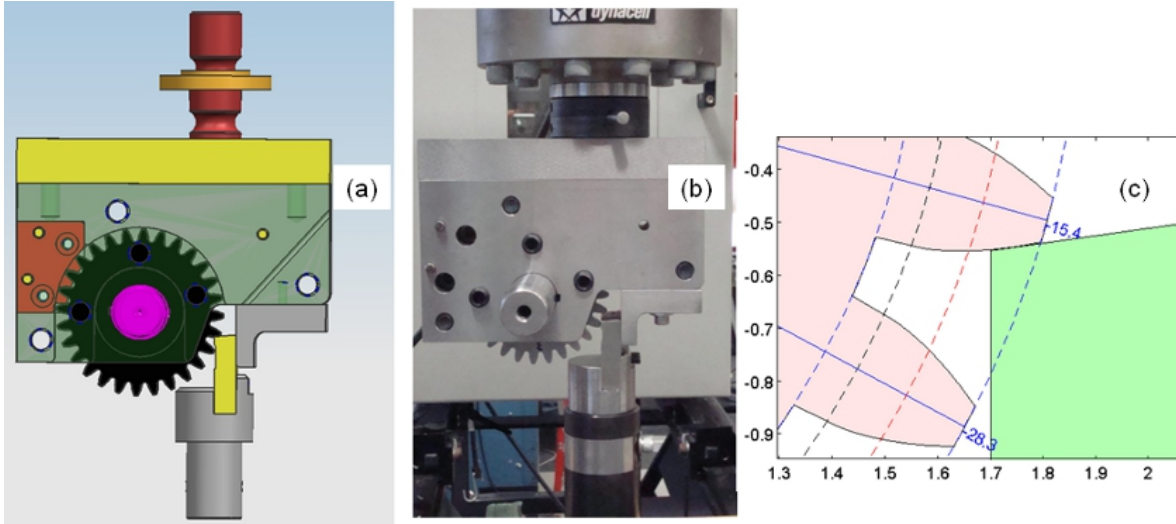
Single-tooth crack-initiation and crack-propagation fixture. (a) Drawing. (b) Photograph. (c) Sketch depicting point of contact.
